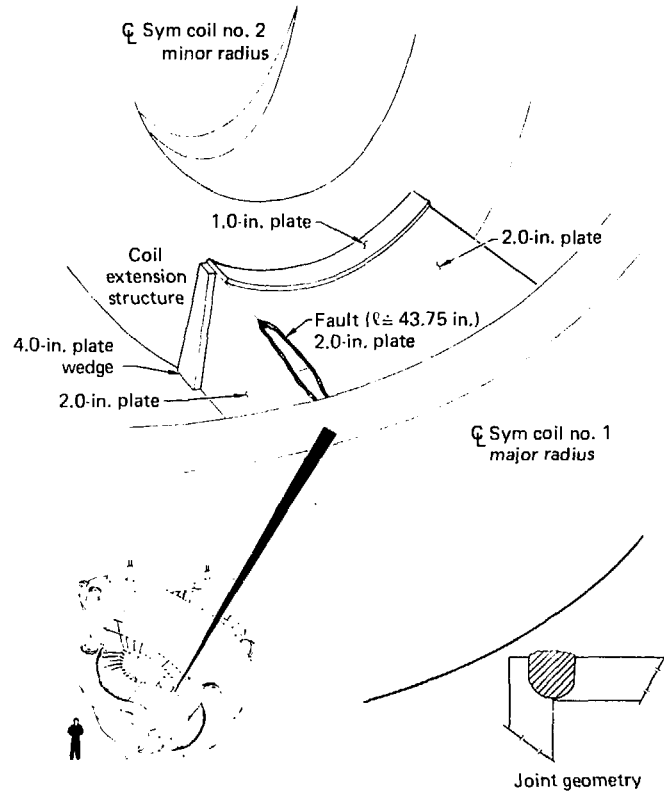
Fault No. 3: intercoil member shear transfer weld, bottom closure plate to side plate corner weld.
